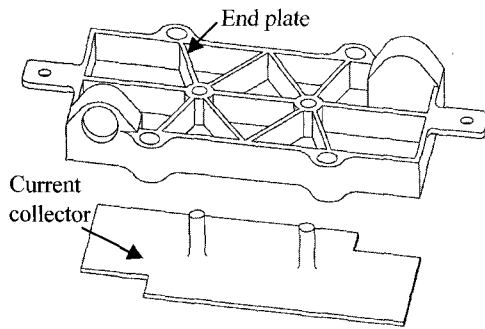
Nonmetal end plate and current collector (modified from Ref. 5)
